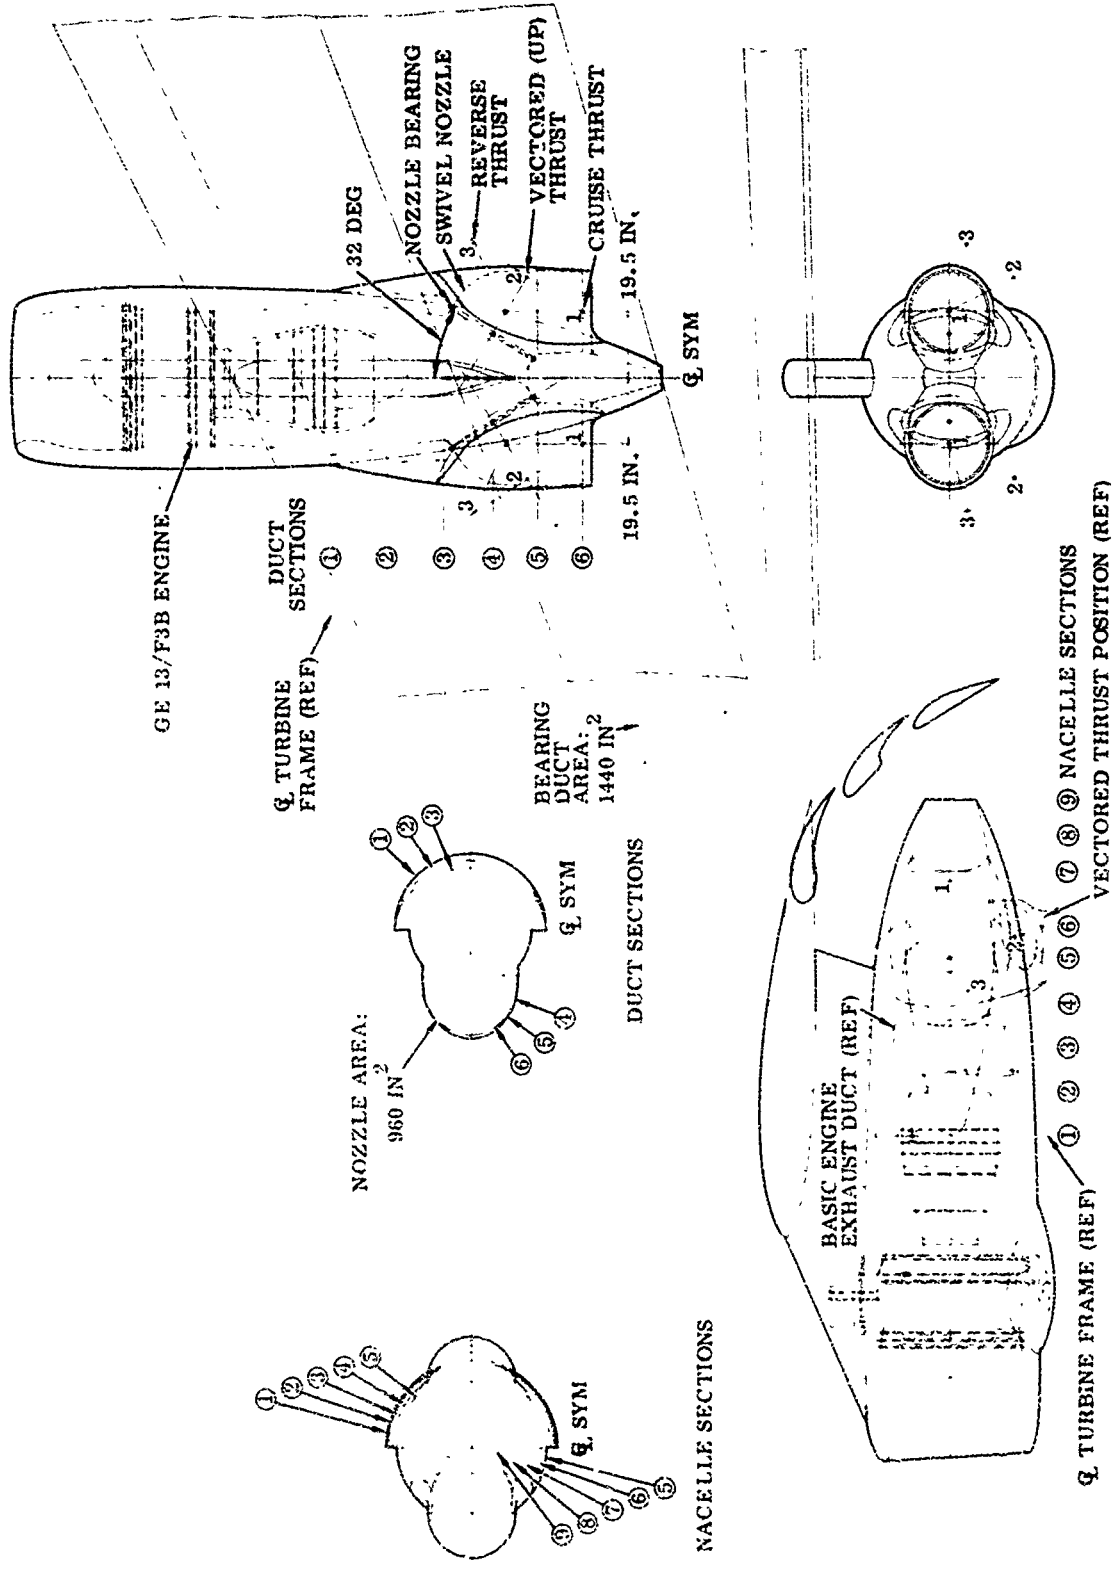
Dual Single-Bearing Nozzle Thrust Deflector (GE113 F3B Engine)
